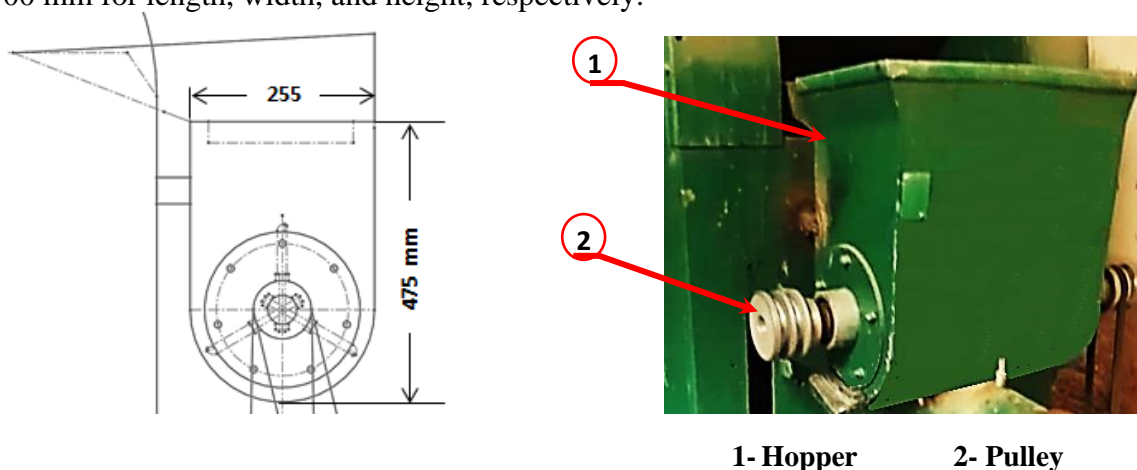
The sketch and photograph of the cutter-mixer machine “CMM”
